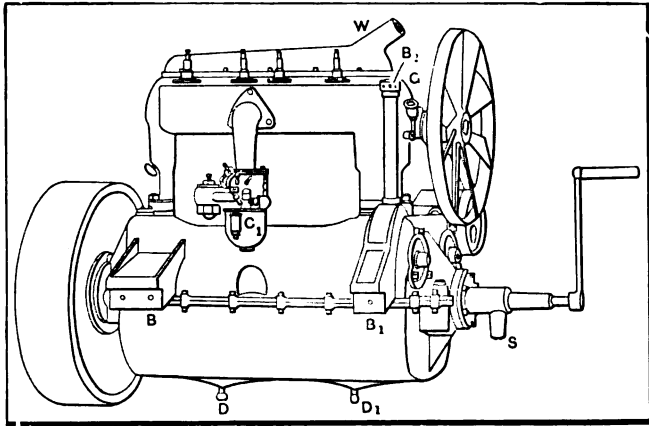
Right-hand view of the motor, showing the short carbureter intake manifold and enclosed valves
